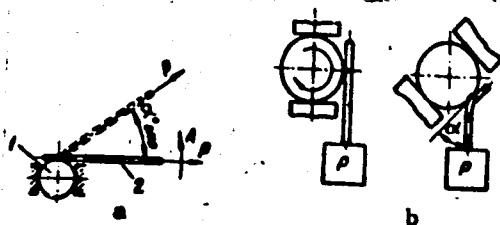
Schematic representation of the fracture-angle tests of cross joints under static loading:
